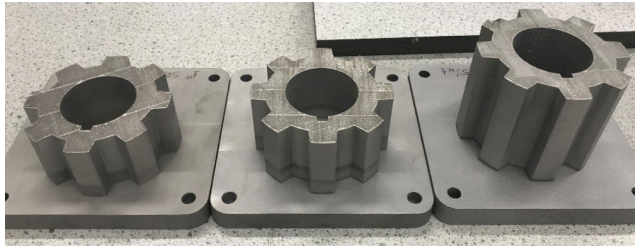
3D printed segments on 125 × 125mm mild steel substrates, constituting the AM rotor.
